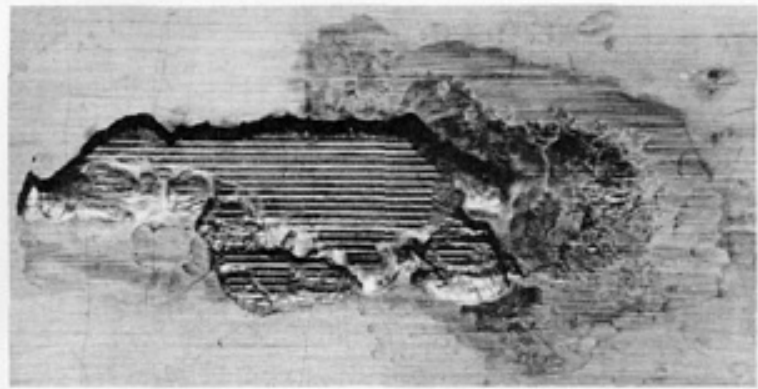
Macrograph of a spall in a babbitt metal journal bearing. 8×
